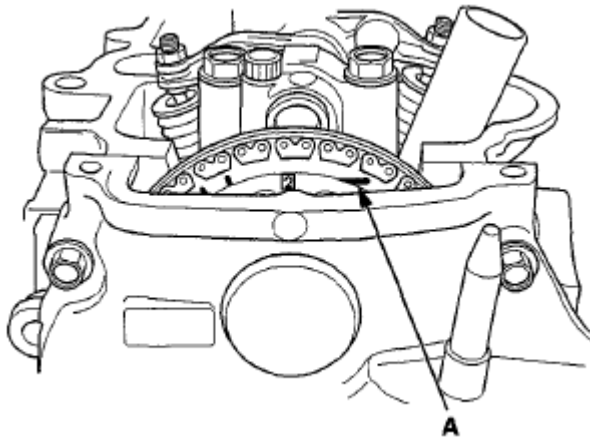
Aligning No. 3 Piston TDC Groove On Camshaft Sprocket With Top Edge Of Cam Chain Case
